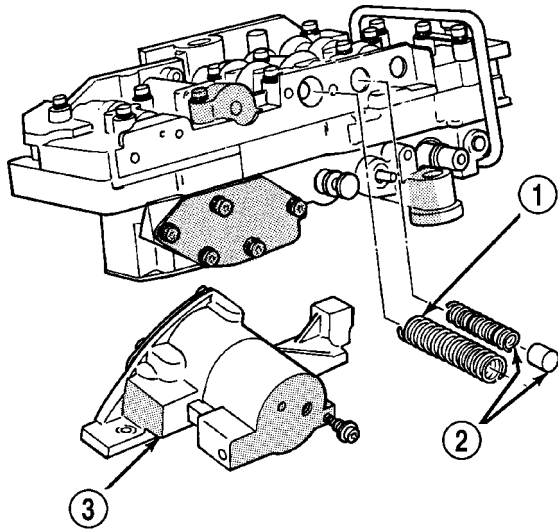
3-4 Shift And Converter Clutch Valve Springs and Plug
